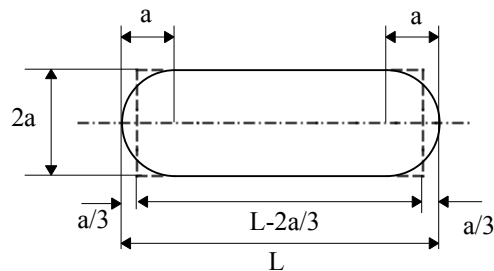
Cross-section of the rounded rod bullet showing the dimensions
